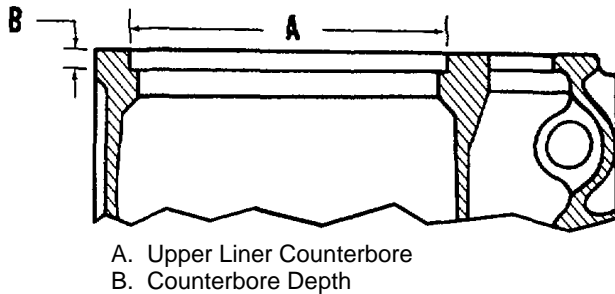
(N 10103). Cylinder liner counterbore dimension location.
